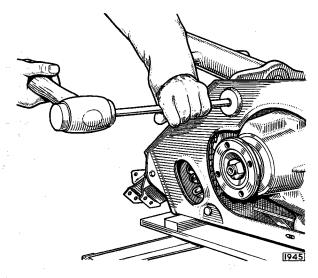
Drifting the inner fulcrum shaft into position and displacing the dummy shafts,
